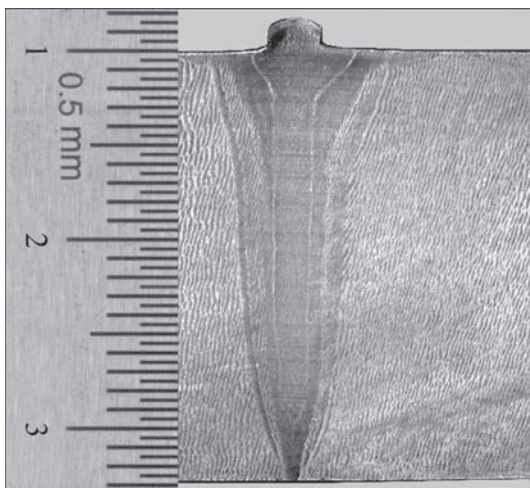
Macrosection of welded joint, produced on the simulator specimen of the bandage part of the package of 23 mm
